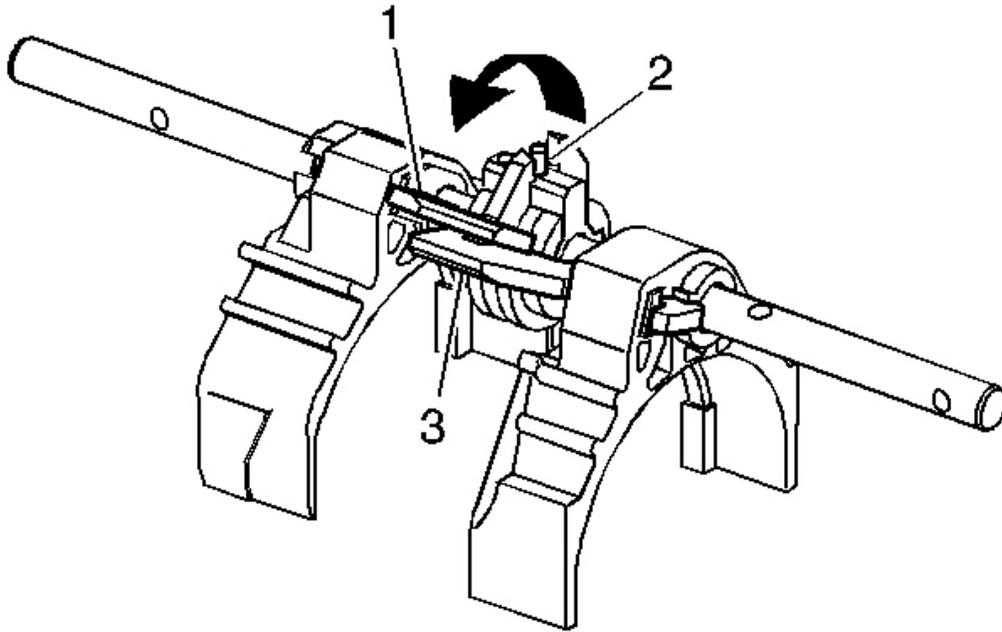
Installing 1st/2nd Shift Shaft Link On Top Of 3rd/4th Shift Shaft Link
